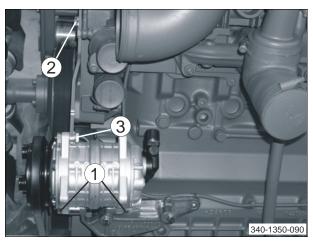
Tensioning and changing V-belt of the air conditioning compressor
